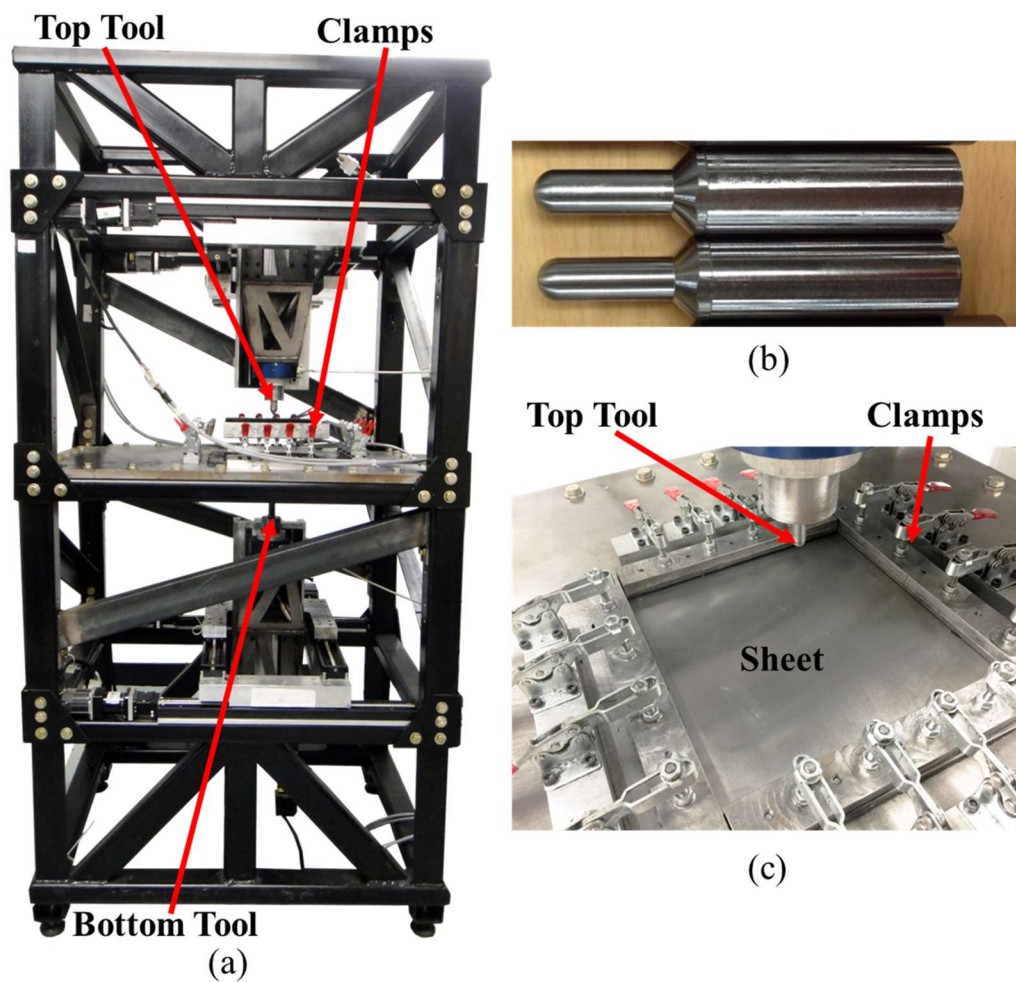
DSIF machine system: (a) DSIF machine; (b) forming tools; (c) clamping system
